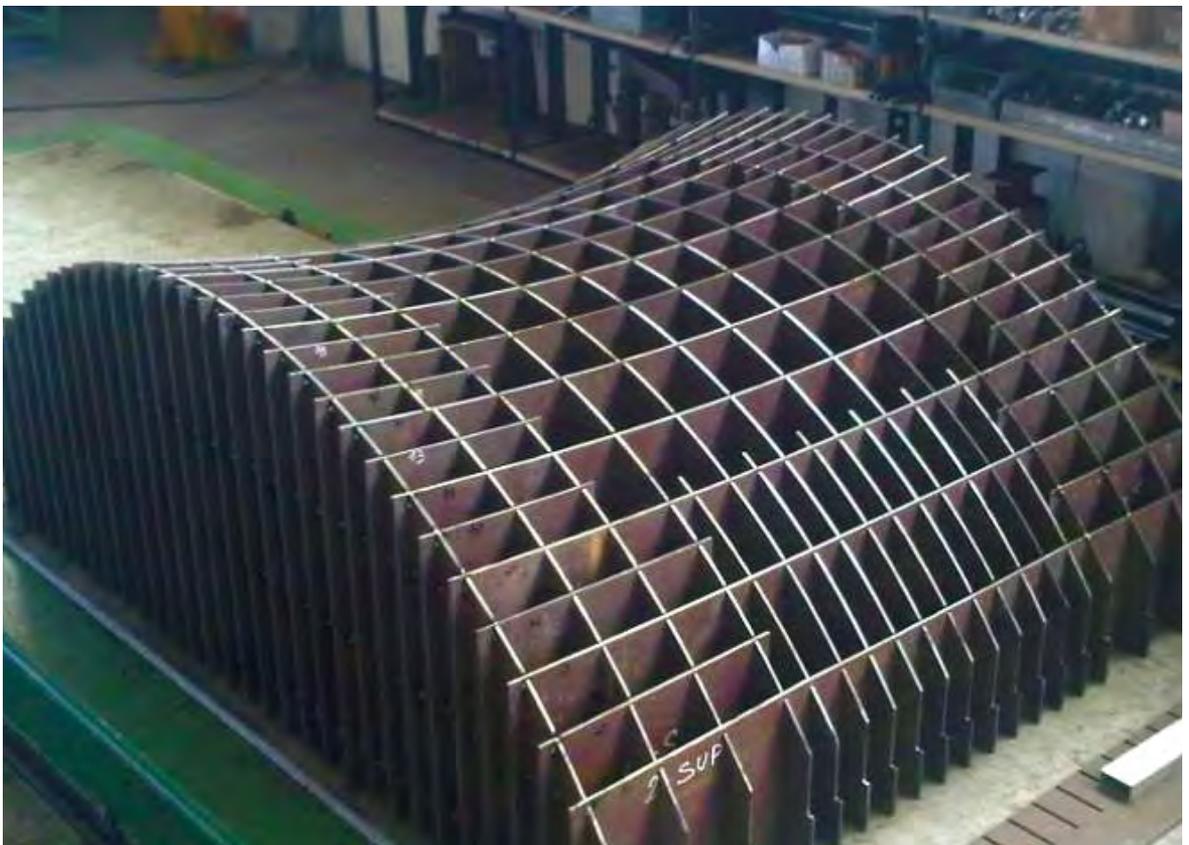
Dies for hot forming tests for 60mm thick saddle-shaped VV plates
